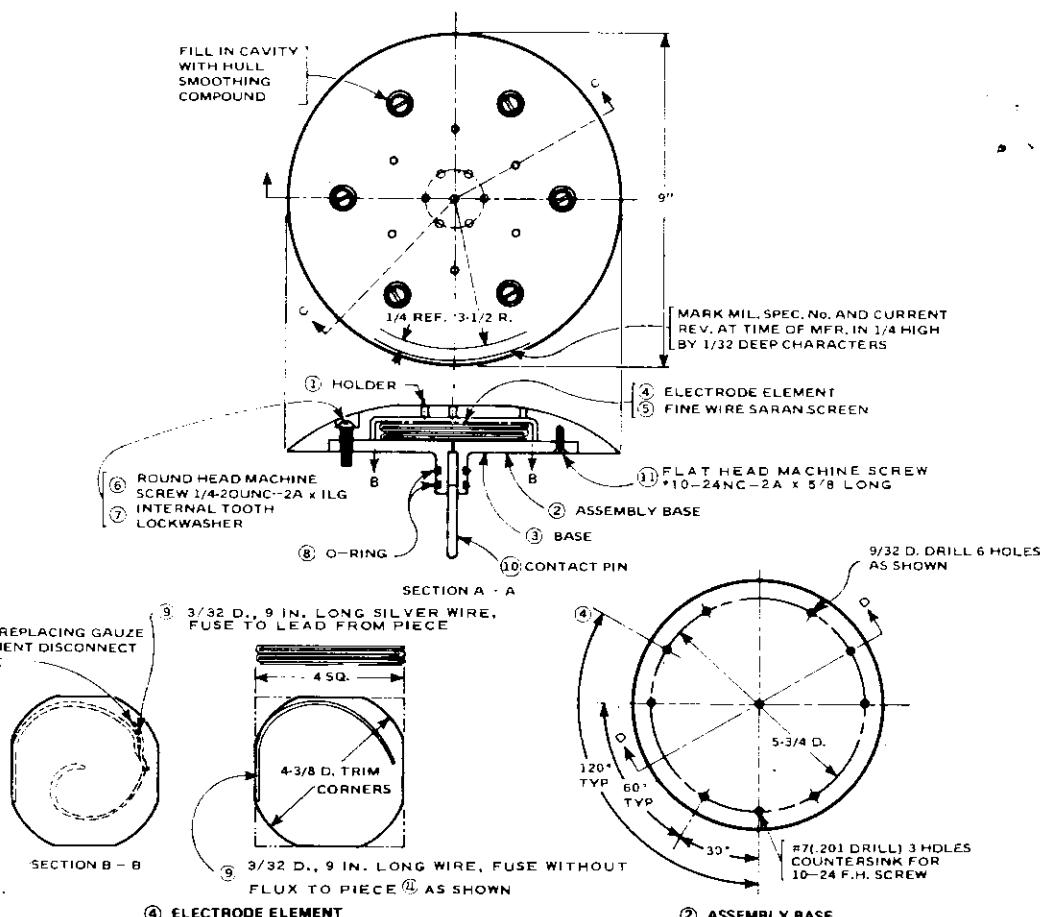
REFERENCE ELECTRODE - SILVER - SILVER CHLORIDE
